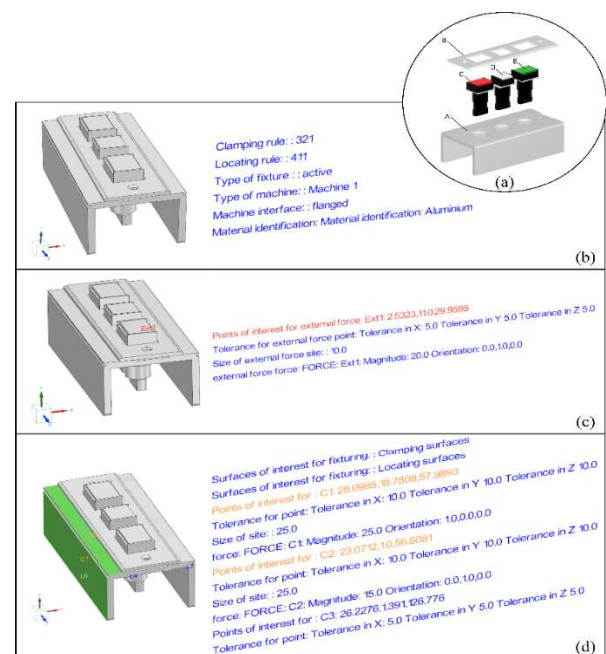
Demonstrative case showed to the interviewees (a) Exploded view of the assembly components
